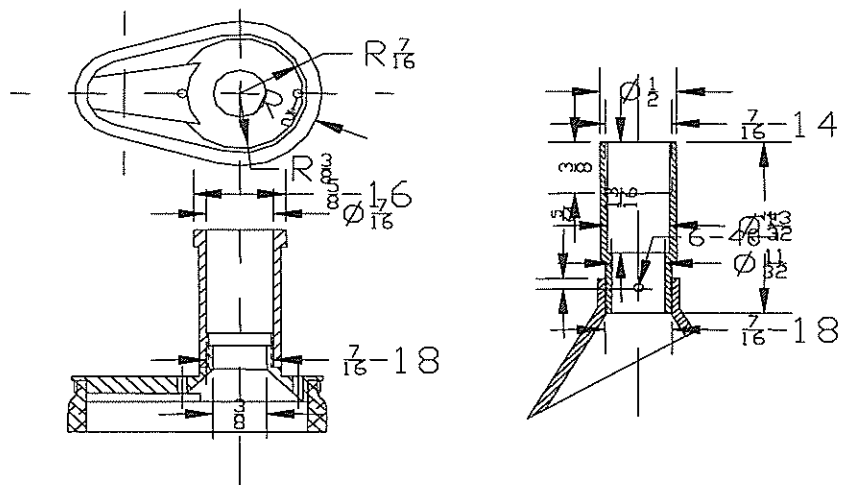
Ovoid shroud designs. Left: for mechanized welding; Right: for semi-automatic welding
